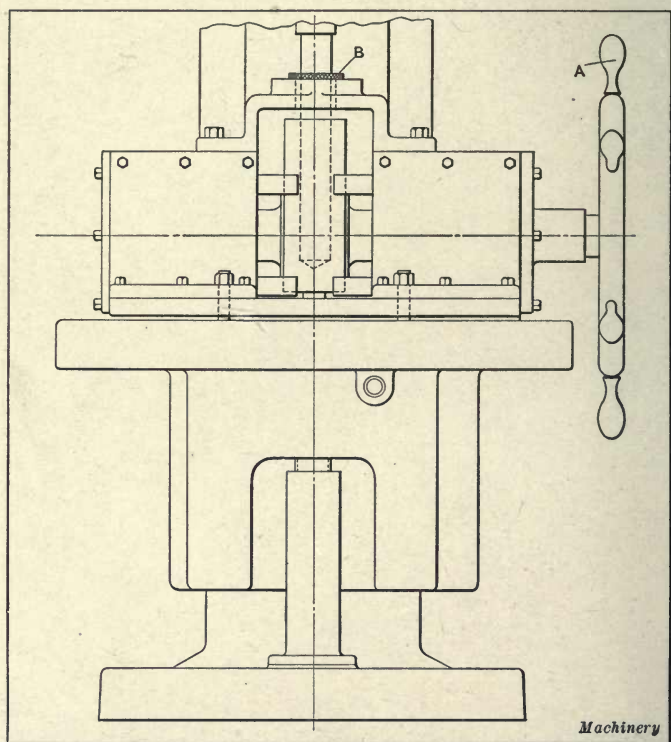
Fixture used in Holding 18-pound Shell Blanks when Drilling
